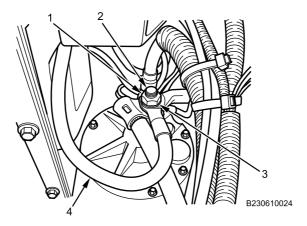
Starter Motor-to-Engine Ground Jumper Cable.
